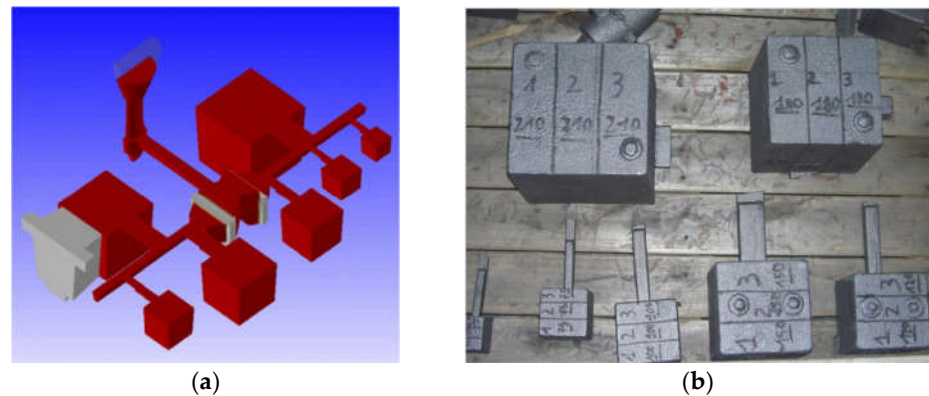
Casting details: (a) “cluster of cubes”, geometry of the sand mold with cubes of different sizes (i.e., 50, 75, 100, 120, 150, 180, 210 mm) formed by Procast; (b) solidified metal cubes, separated and with indications of the cutting directions.
